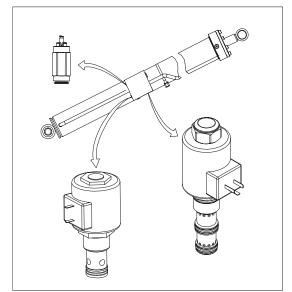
Lift Cylinder Holding Valve and Fitting Removal
